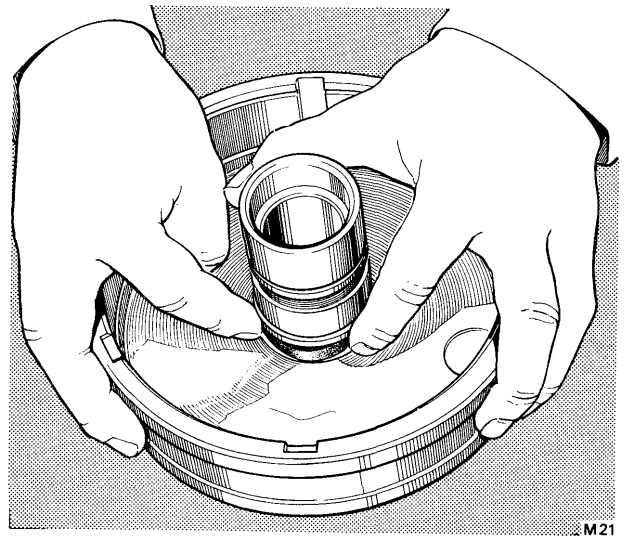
FITTING THE OIL SEAL TO THE CENTRE CLUTCH DRUM ASSEMBLY
